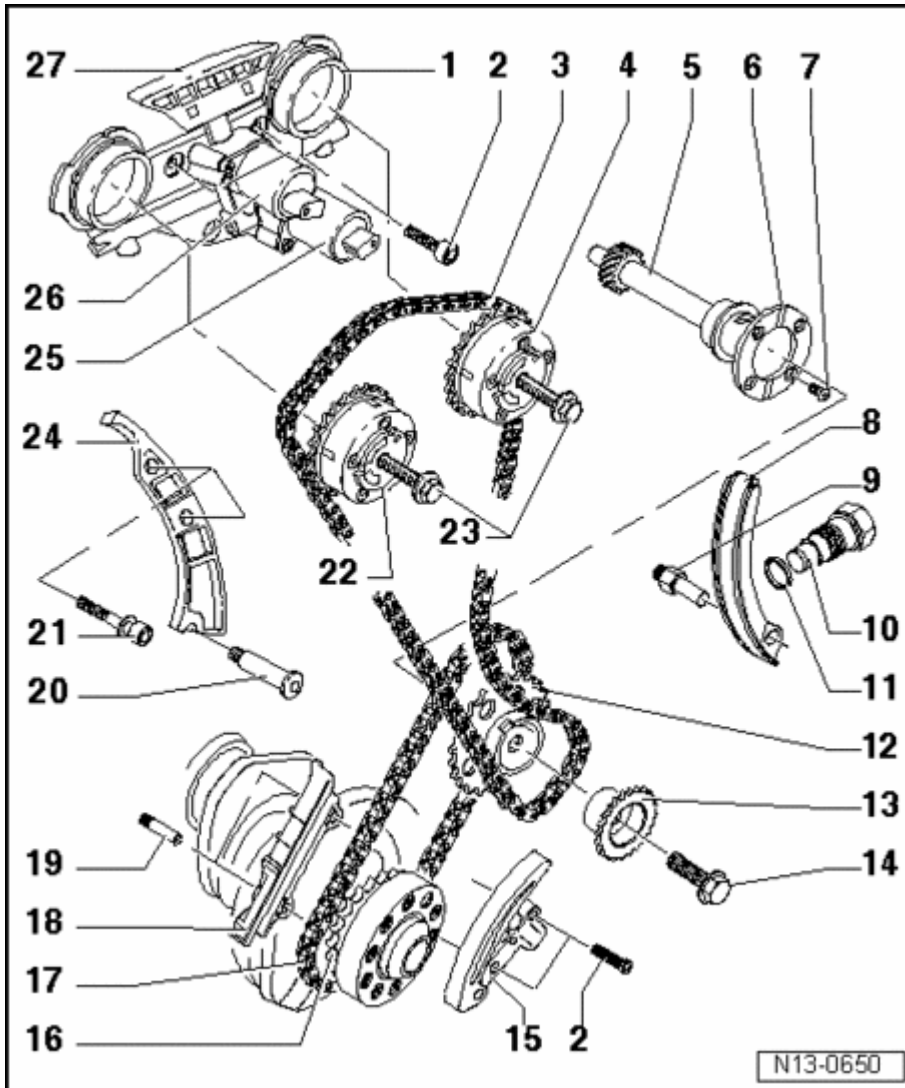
Identifying Chain Drive, Assembly Overview - Part I
